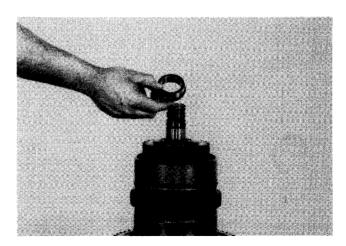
Install clutch shaft front bearing inner race with large diameter of race down.
